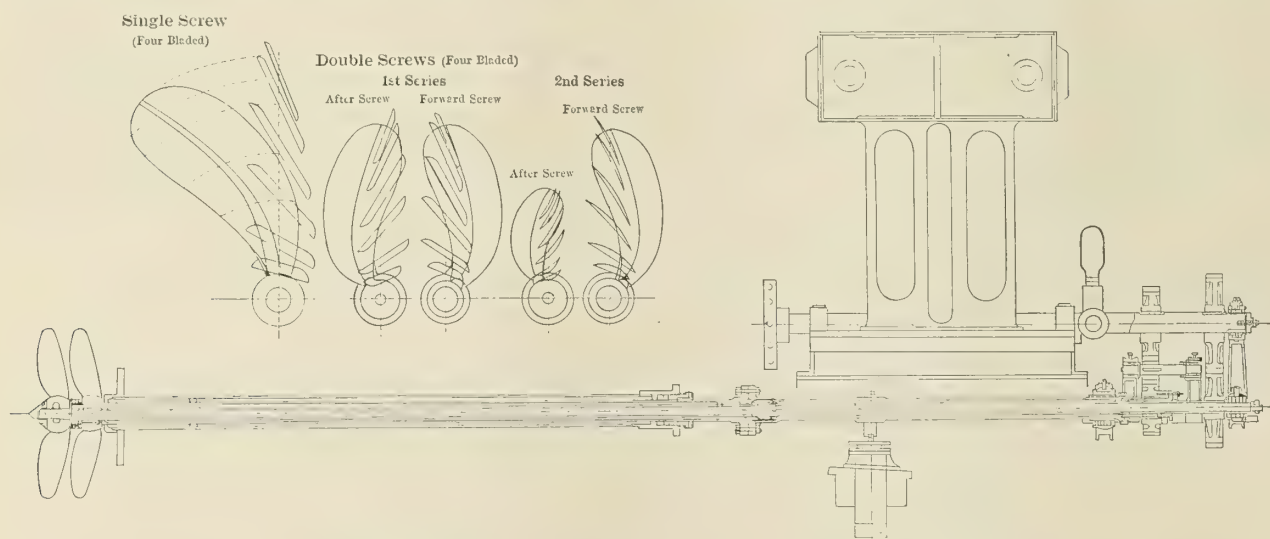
SHAPE AND DIMENSIONS OF THE SCREWS, AND GENERAL ARRANGEMENT OF ENGINE, SHAFTS, BEARINGS AND GEARS ON STEAMBOAT.
